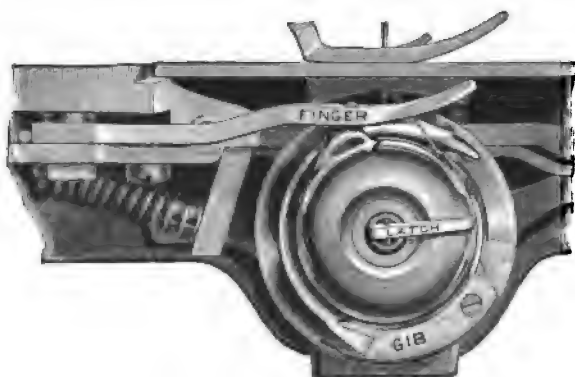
Wheeler &amp; Wilson bobbin and bobbin case in the rotary hook.
